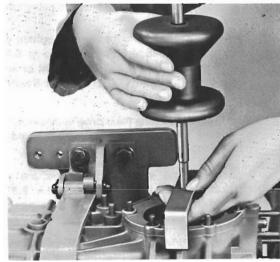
A slide hammer and puller being used to remove a side cover from an early transmission.
